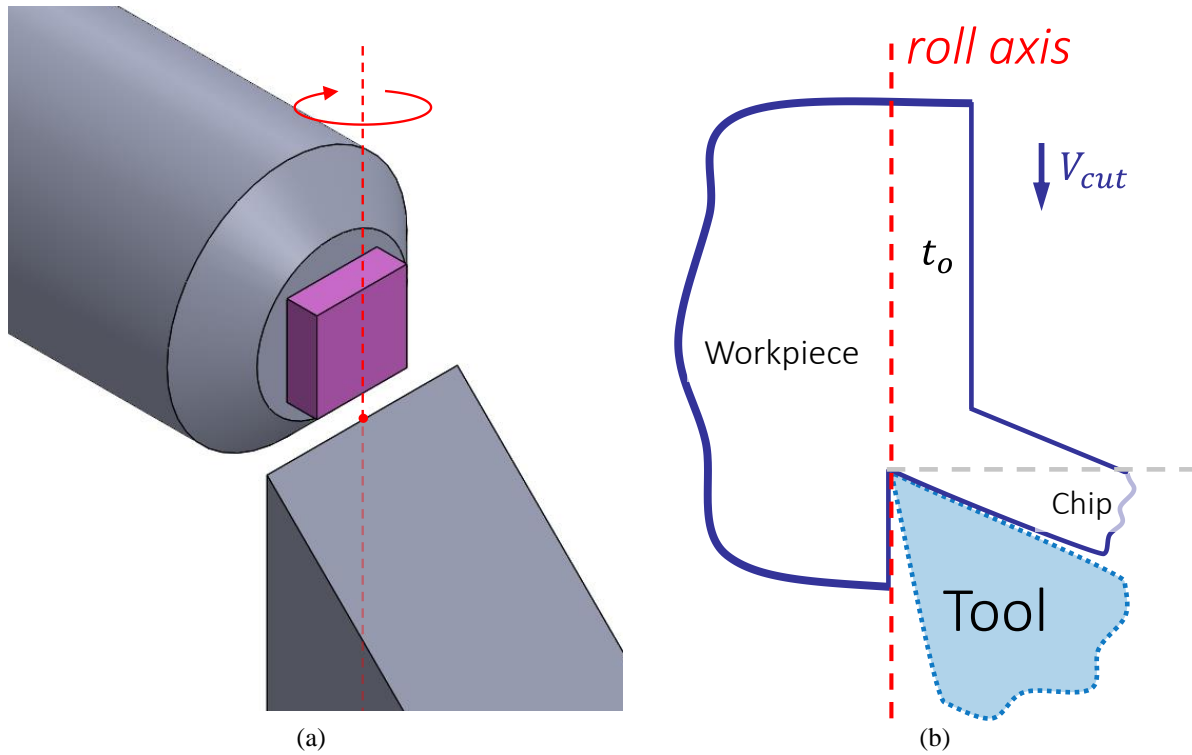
Roll/twist dig-in. (a) 3D view – the knife tip rotates about the dashed line (b) 2D side view. Rotations about this line would cause one end to dig deeper into the workpiece, and the other end to lift out of the material.
